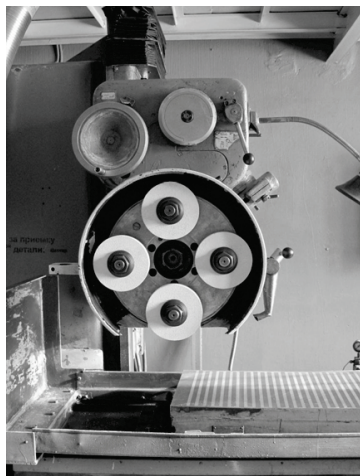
General view of the planetary grinding head mounted on a surface grinding machine Jotes SPD-30b (Poland)
